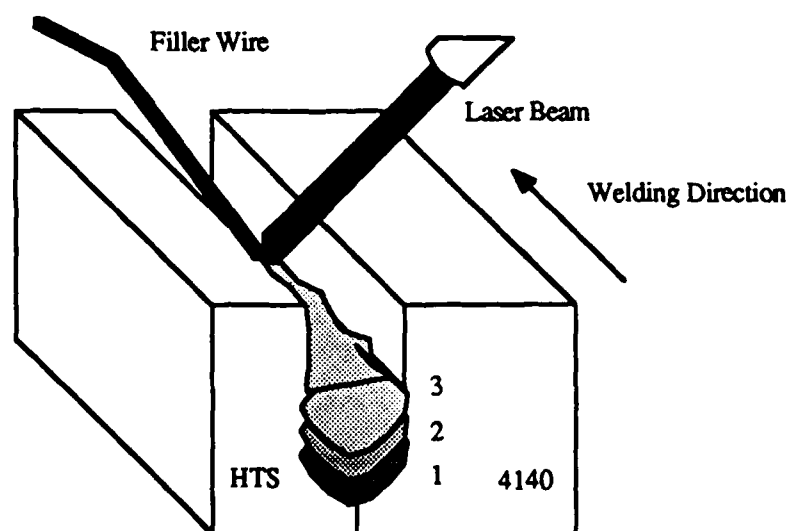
Sketch of Welding Operation Showing Progression of Third Laser Pass.
